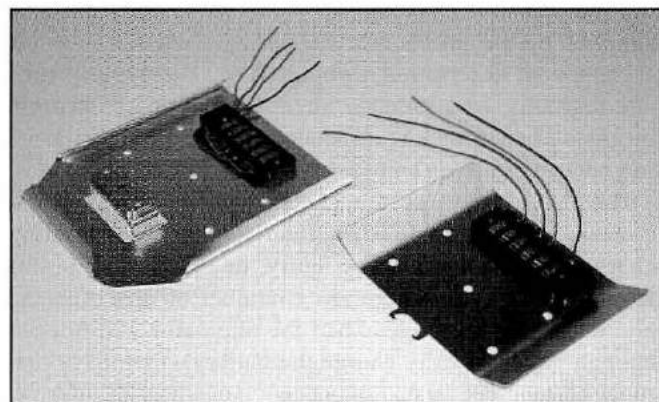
This "slide-in" adapter makes it convenient to install and remove a mobile transceiver.
